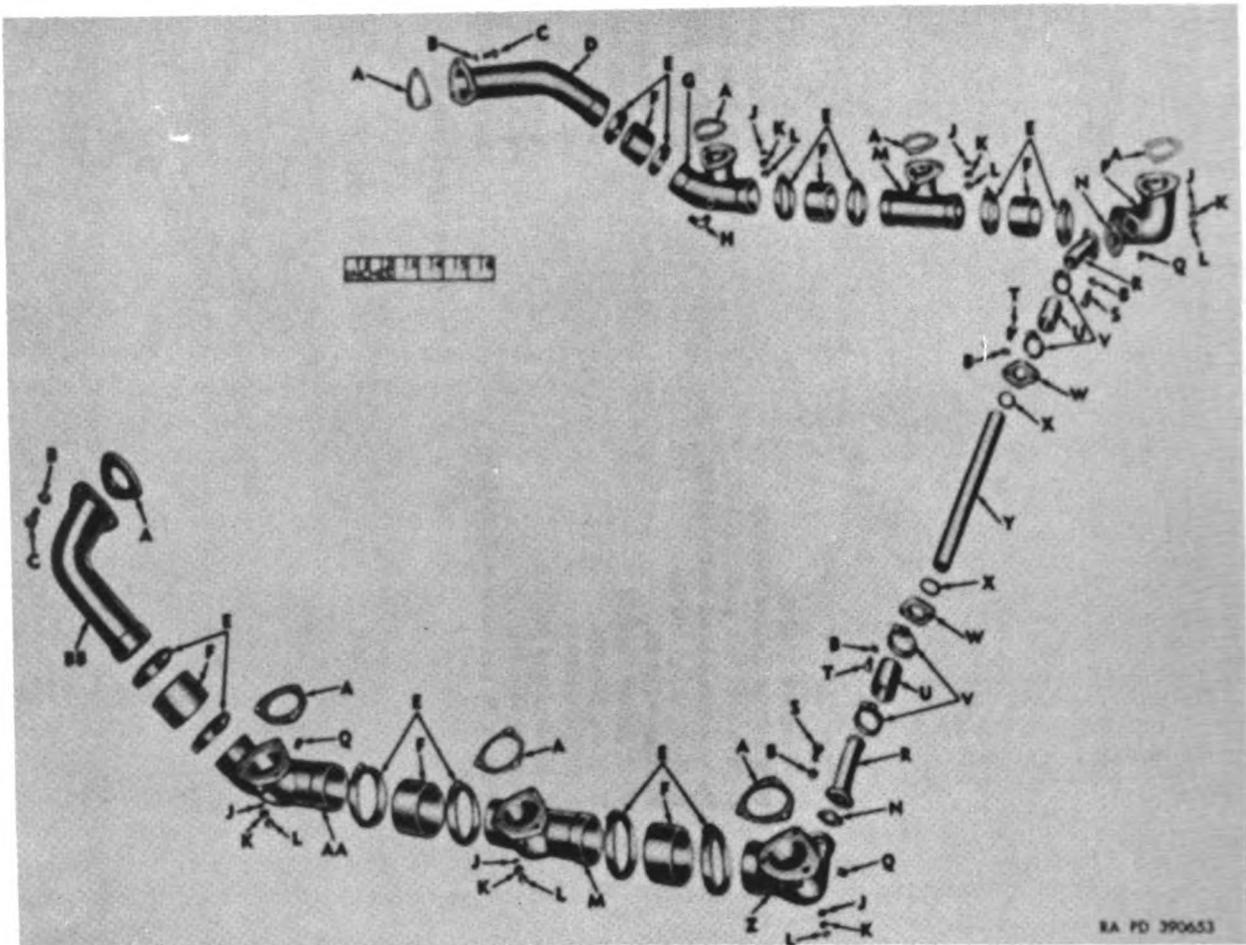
Intake manifolds, balance pipe, and connectors—exploded view.
